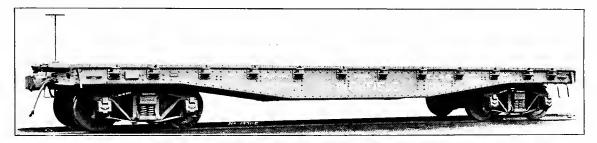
Steel Frame 50-Ton Capacity Flat Car. Weight, 39,500 lbs.; Length of Platform, 40 ft.; Height, Rail to Top of Platform, 4 ft. 03% in. Builder, Pressed Steel Car Co.
